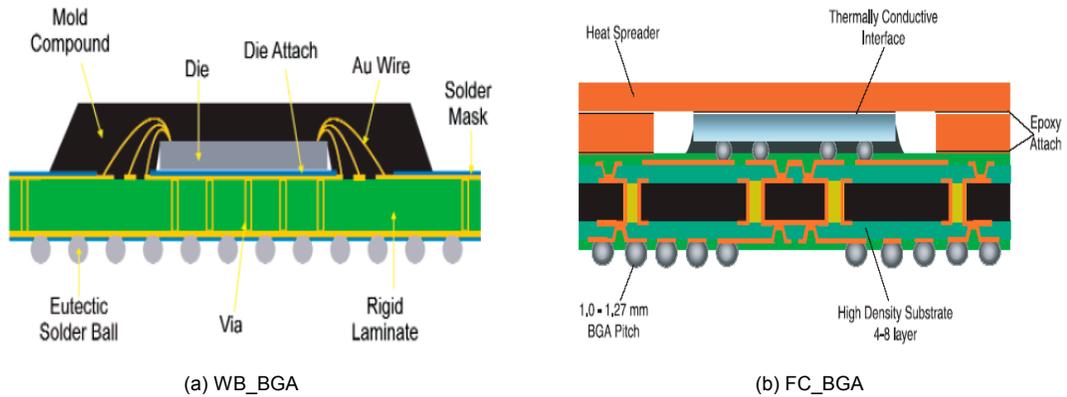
Cross-Sectional Views of WB_BGA and FC_BGA packages.
